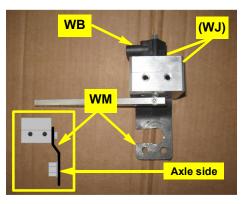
with inset: WAS assembly on its mounting bracket installed - 2WD models
